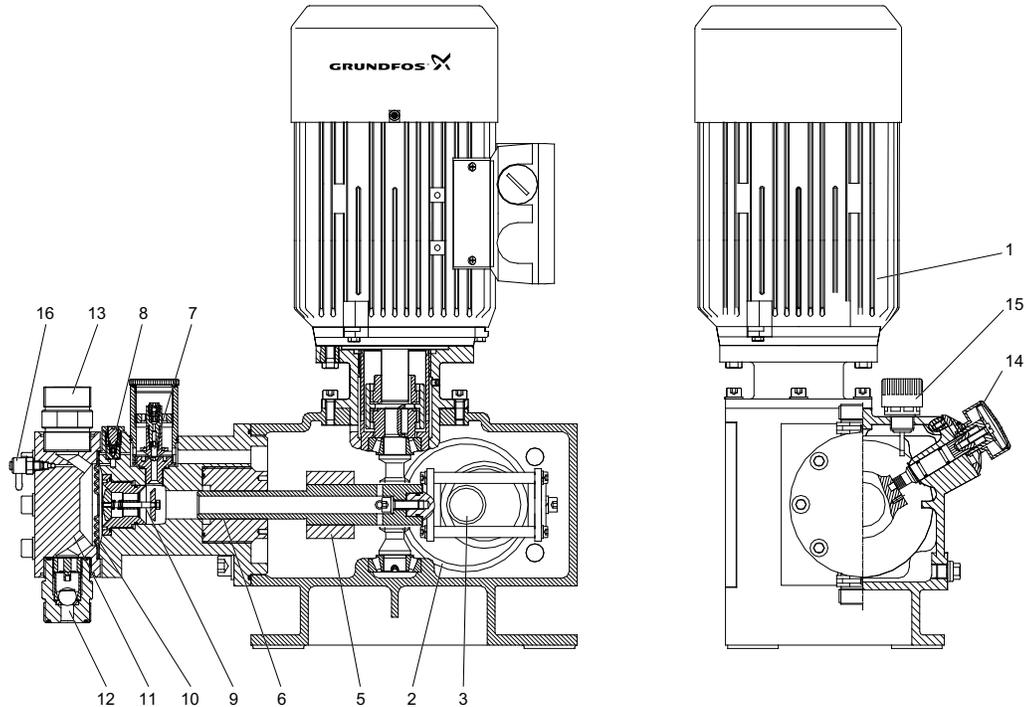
Sectional drawing, DMH models 285, 286, 287
